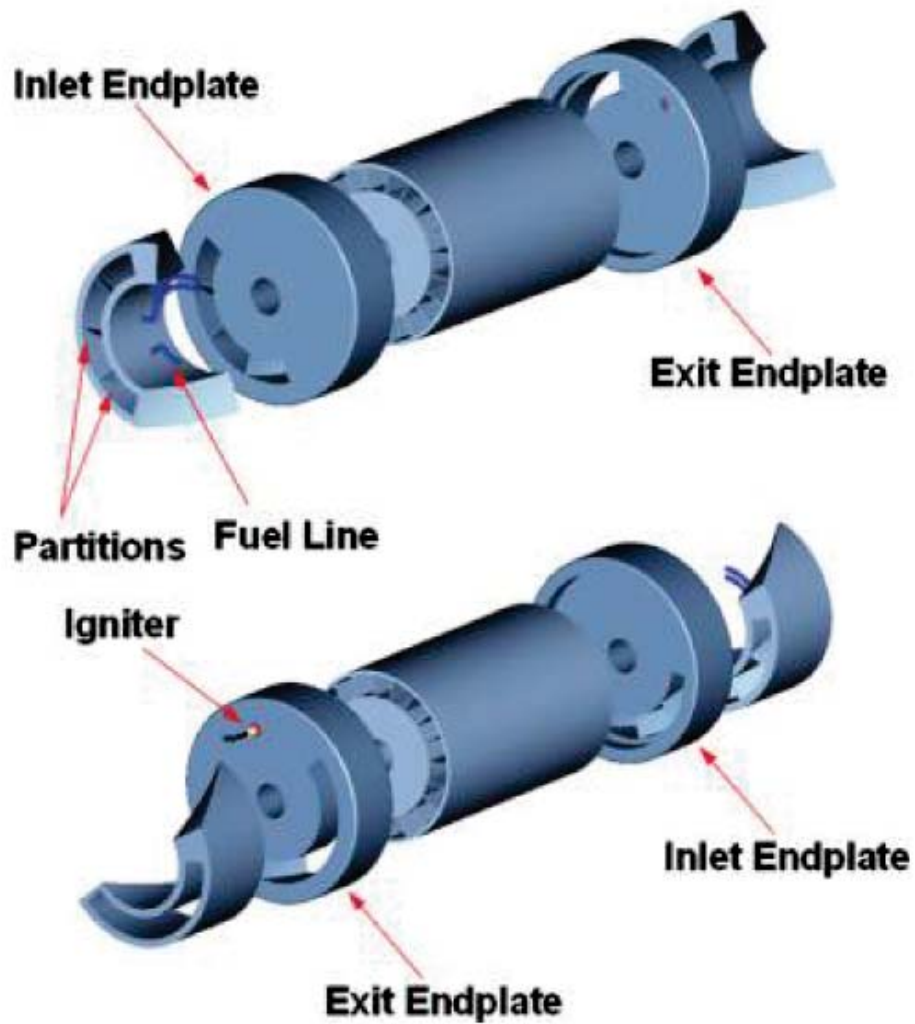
Wave rotor design showing rotor, seal plates, and manifolds along with the igniter. [6]
